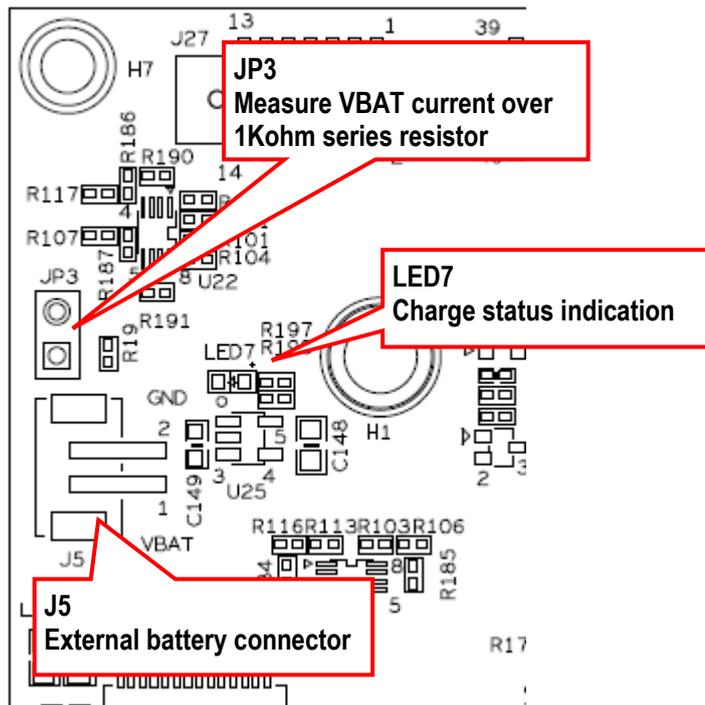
COM Carrier Board rev B/C, VBAT Coin Cell Holder Connector
